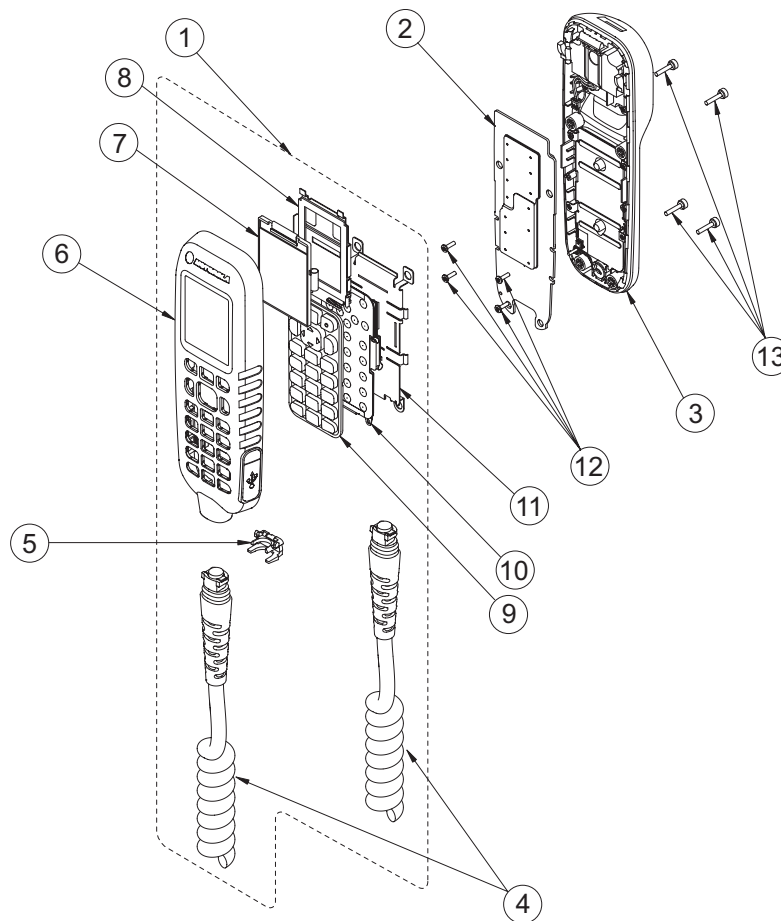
Telephone Style Control Head (Handset) – Exploded View 2
